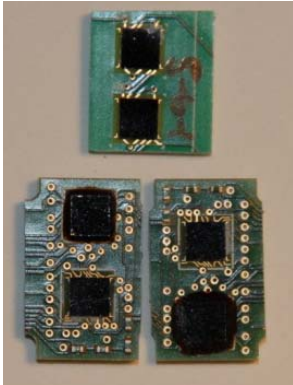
Test boards after firing. The upper board contains test devices used for shear tests.
